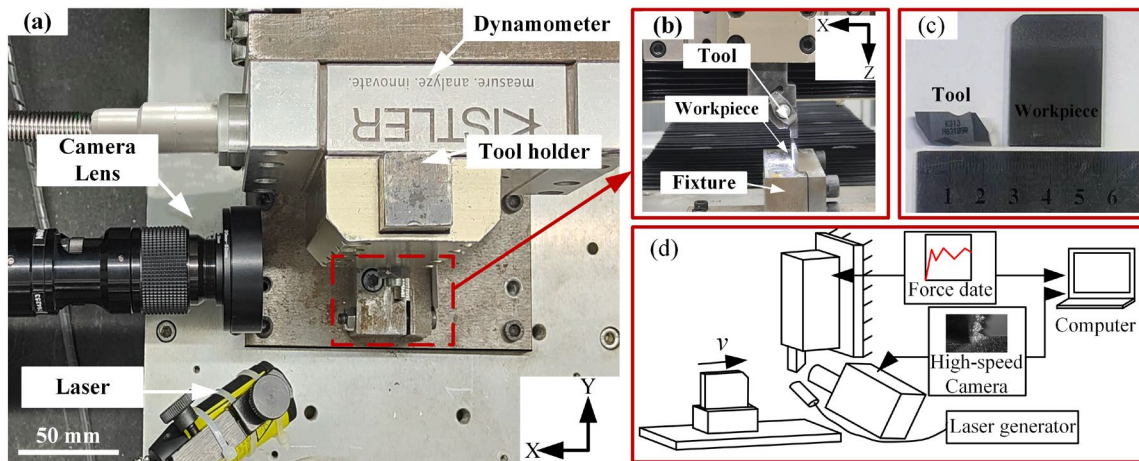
Orthogonal cutting platform. (a) Top view; (b) Front view; (c) Tool and workpiece; (d) Schematic diagram.
